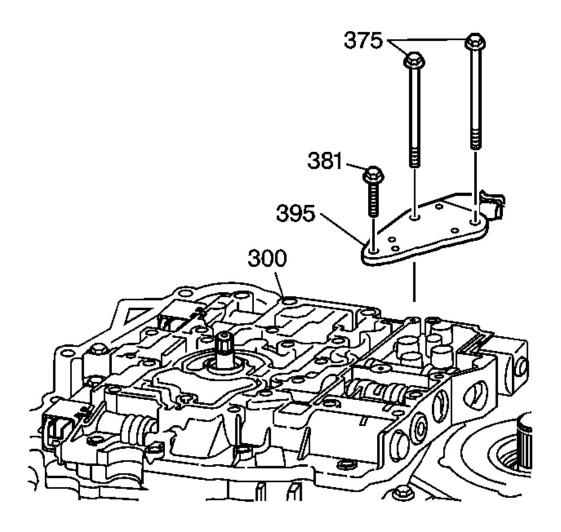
Removing/Installing Transmission Fluid Pressure (TFP) Manual Valve Courtesy of GENERAL MOTORS CORP.
